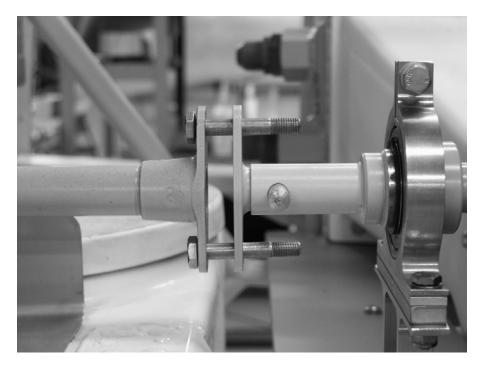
Oil Cooler Blower Shaft Vertically Aligned
